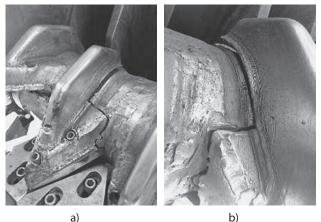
Failure of the welded joint of the moving knife holder a) general view, b) detailed view of the broken welded joint
